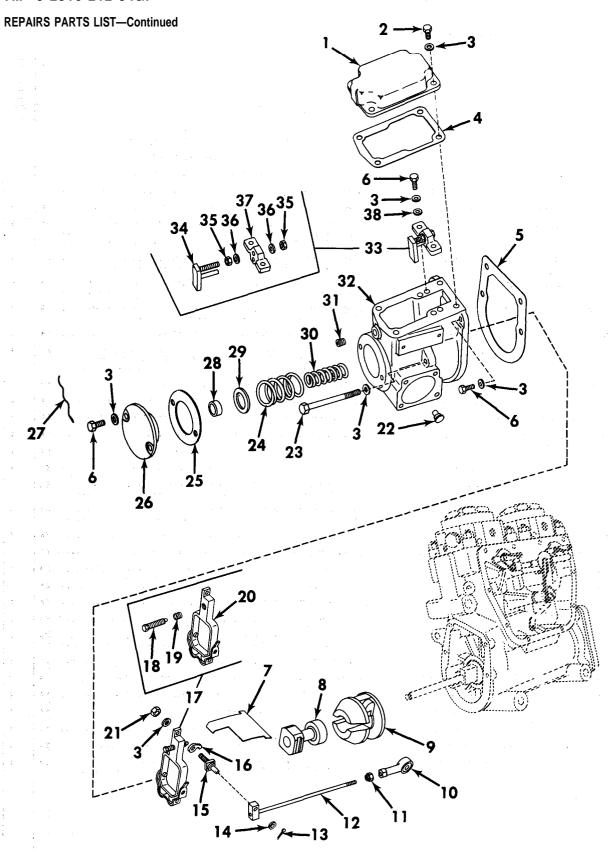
Governor Housing, Fulcrum Lever, Sleeve Assembly, Weight and Spider Assembly, and Associated Parts.
